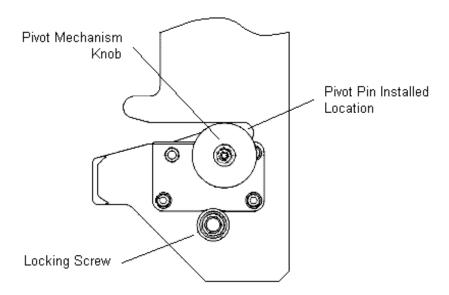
Lower Attach Mechanism, Pivot Knob (inside, left).
